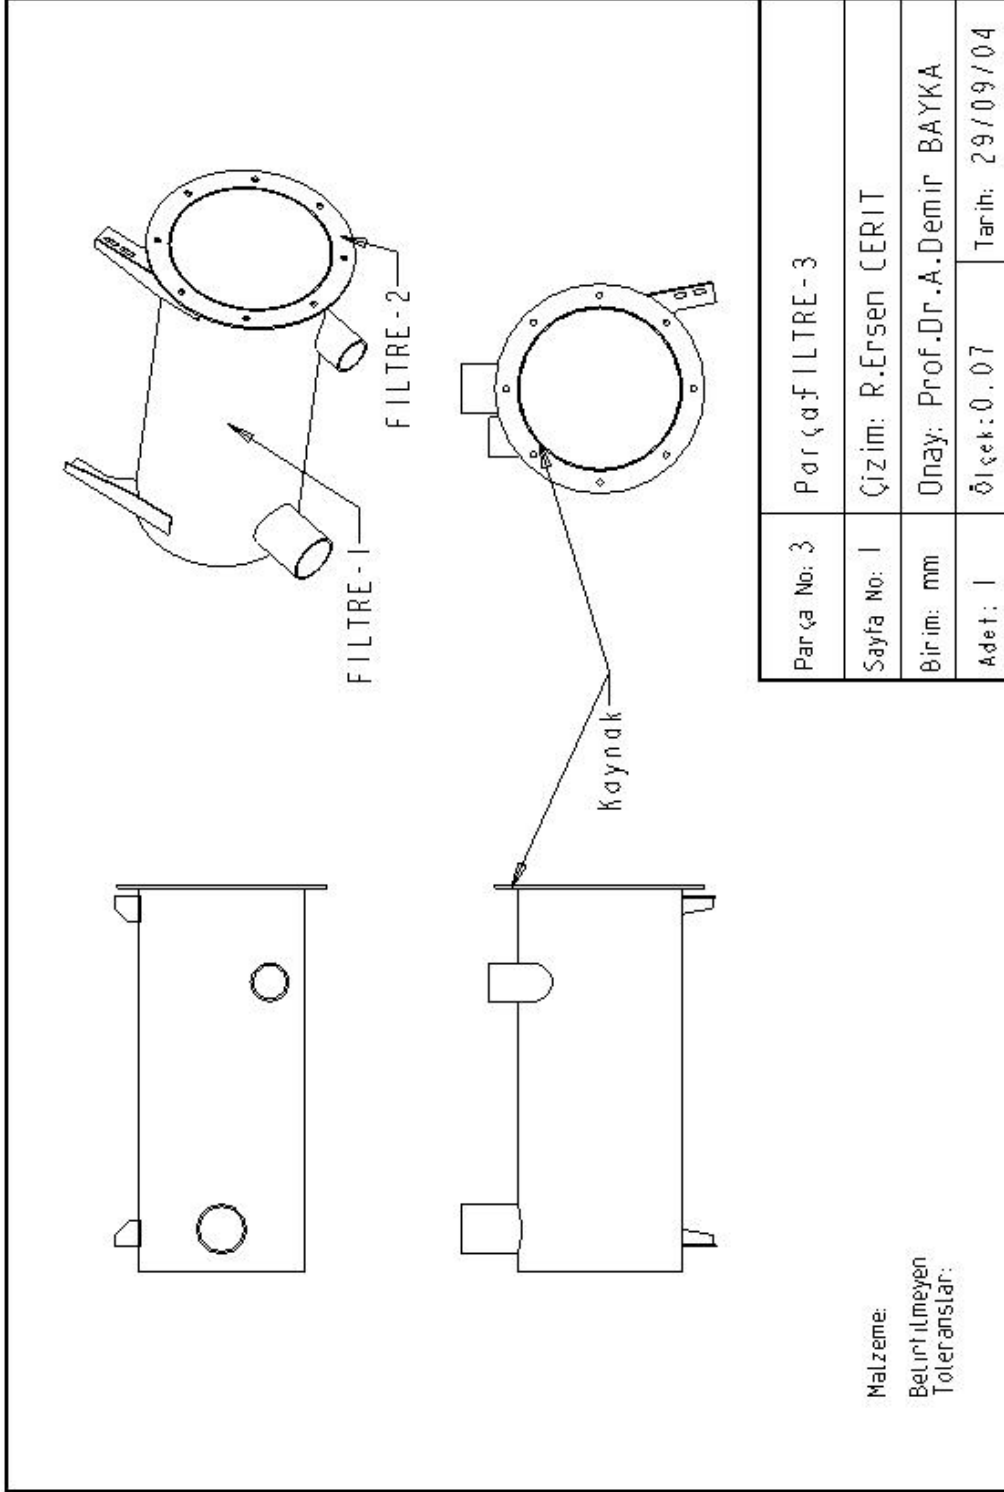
Technical Drawing of Welded Silencer.
